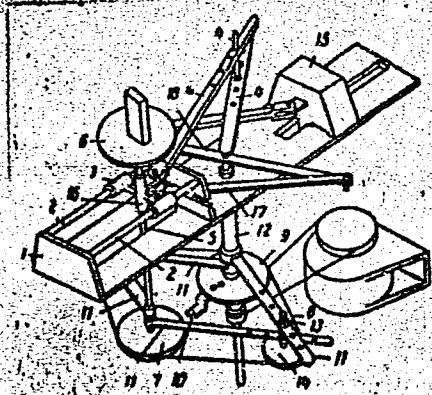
1--frame; 2--guides; 3--sleeves; 4--crankshaft connecting rod mechanism; 5--table shaft; 6--table for devices to be tested; 7--sprocket; 8--chain drive; 9--sprocket; 10--base of the unit; 11--levers; 12--sleeve of the frame; 13--intermediate axle; 14--sprockets; 15--weight; 16--shaft sleeve; 17--levers; 18--rocker
